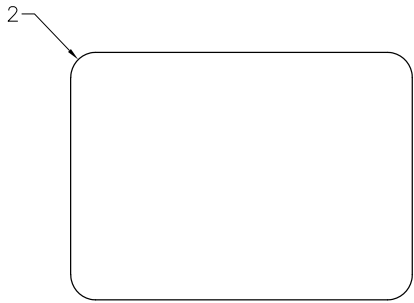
Rectangle filleted using the same radius with the Equal button chosen
